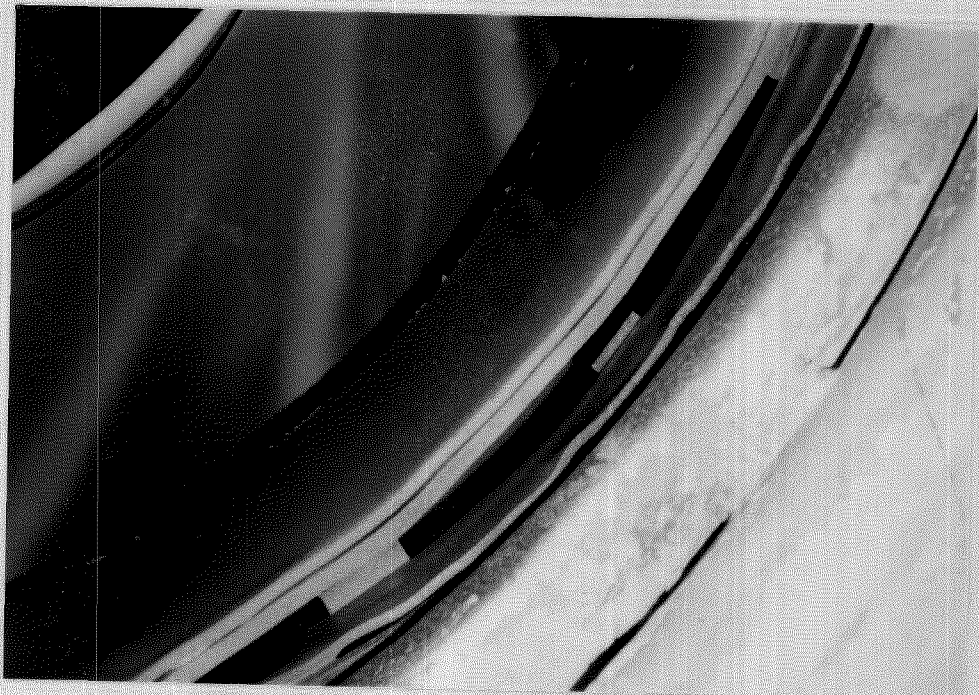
Throat sleeve casing ring and seal showing signs of overheating and thermal expansion.
